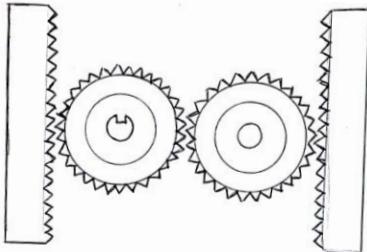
, SIDE VIEW GEAR SYSTEM AFTER REDESIGN
